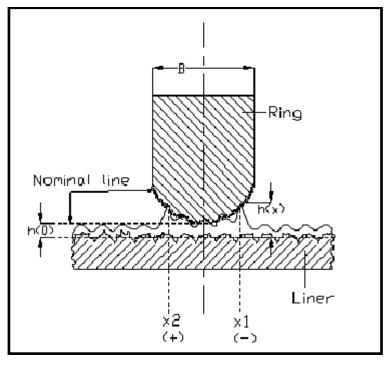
Lubrication Conditions Encountered by Piston rings[21]
